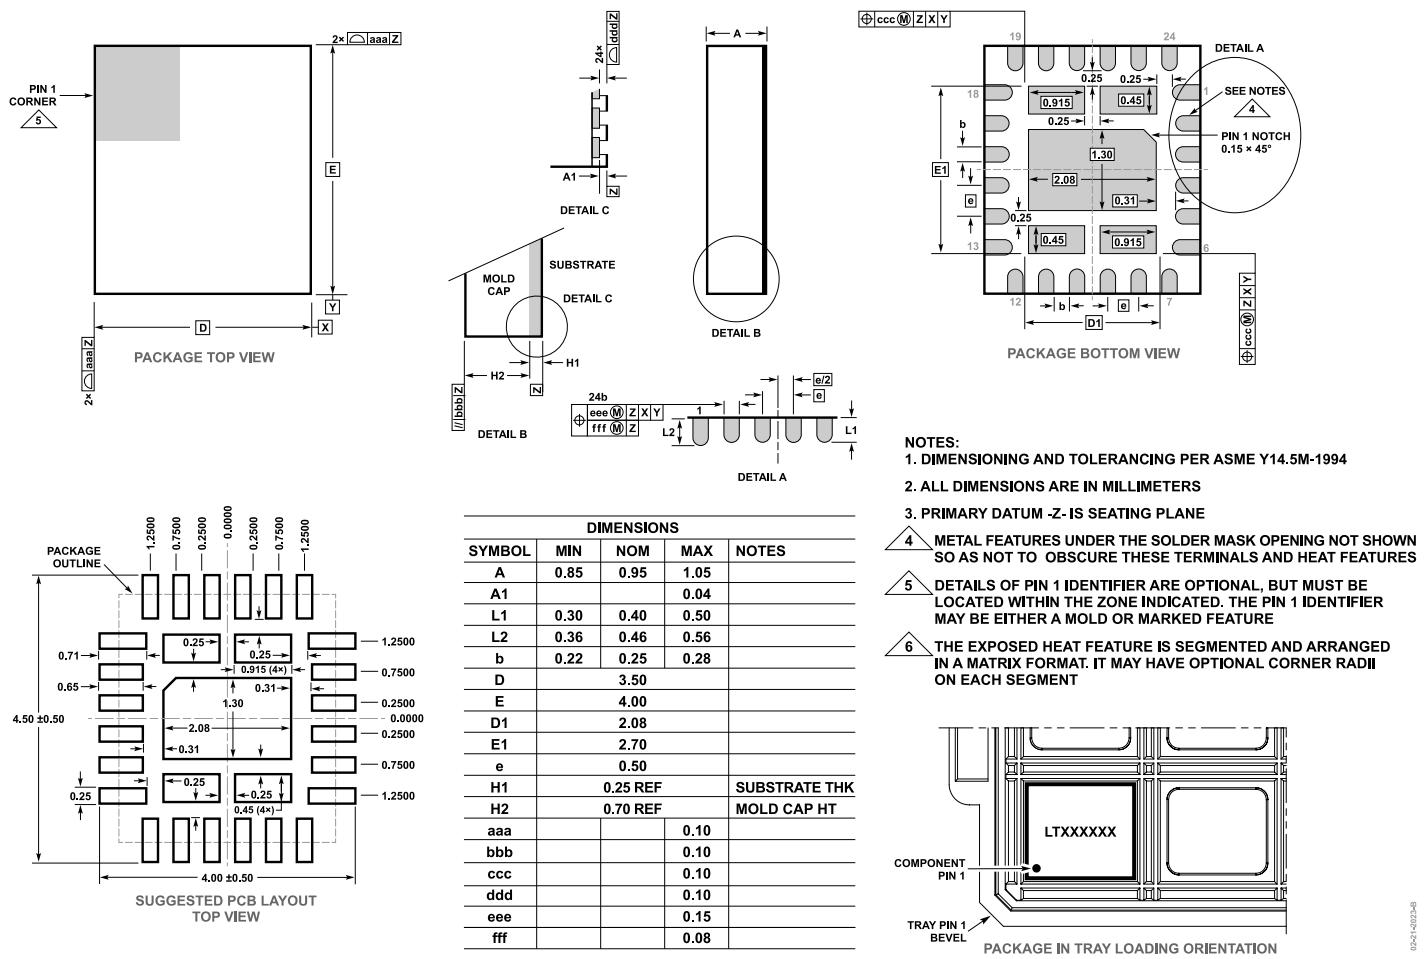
24-lead (3.5 mm × 4 mm) LQFN Package
